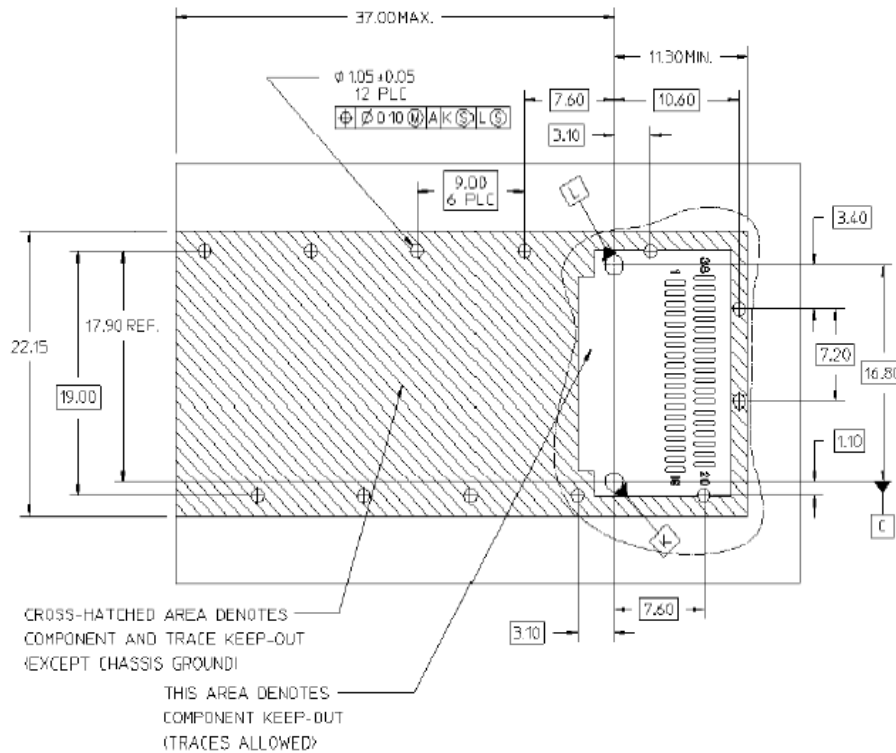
Mechanical Dimensions of Electrical Connectors on QSFP+ module PCB
